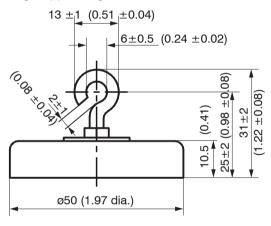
Magnetic holder MH1 - WDS, dimensions in mm (inches)
